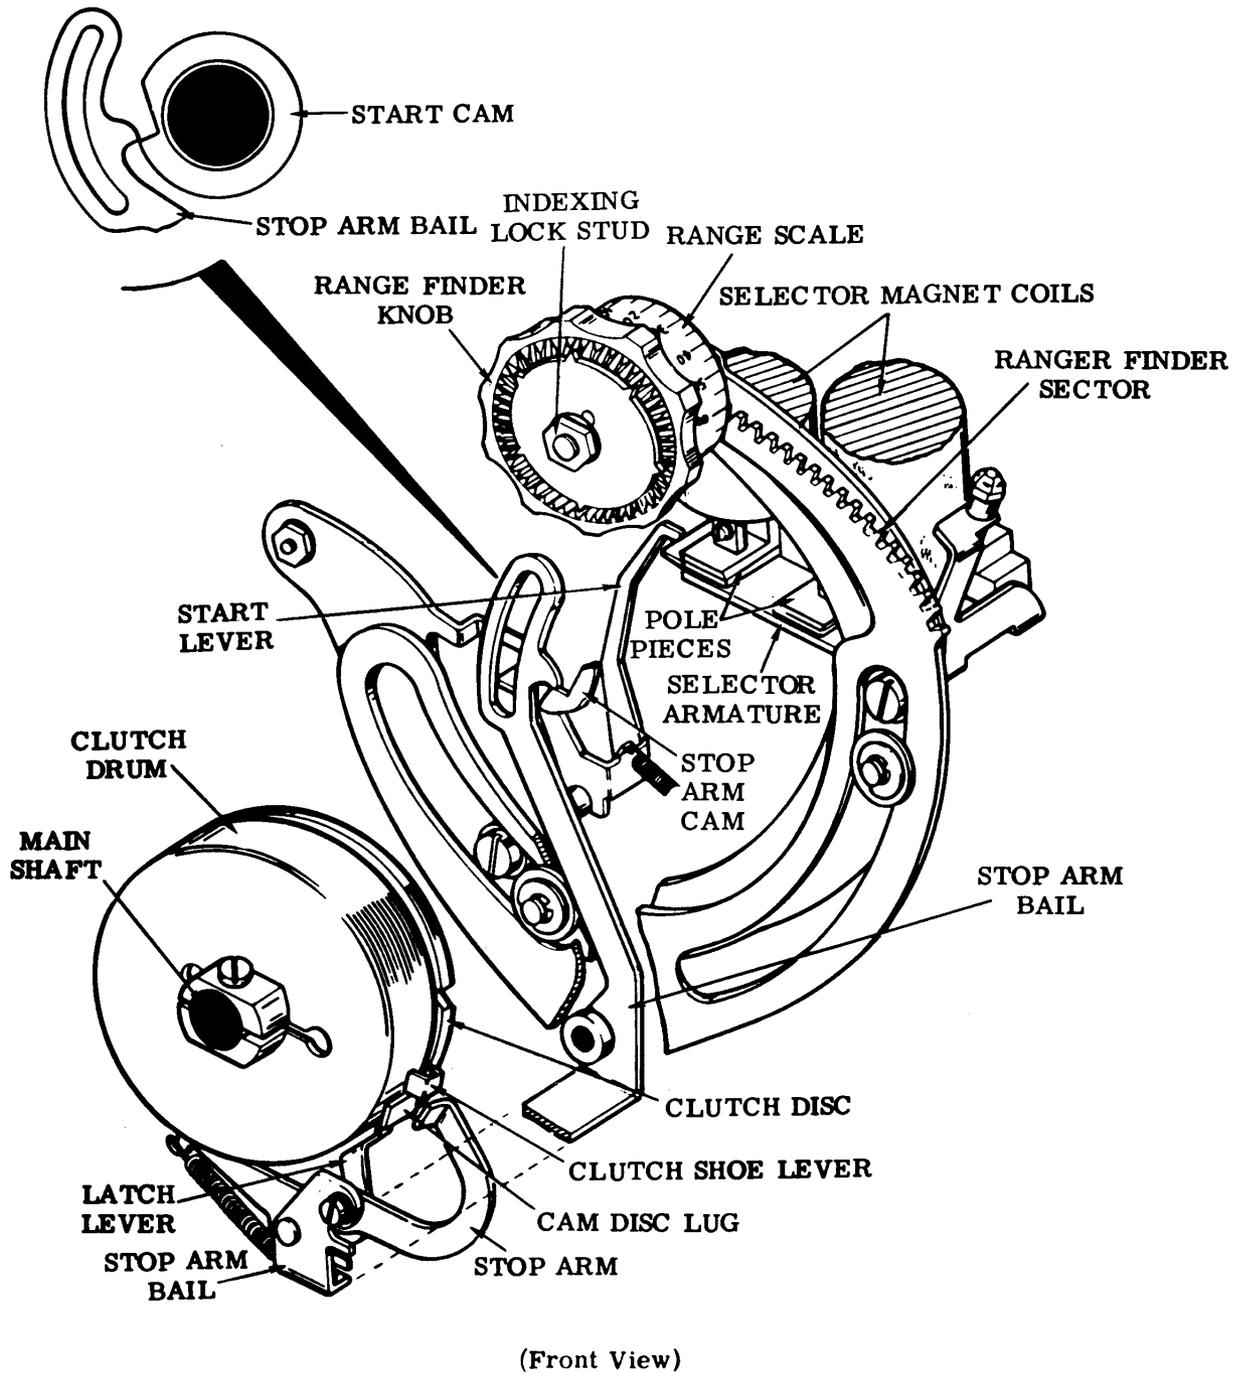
Range Finder and Selecting Cam-Clutch Assembly
